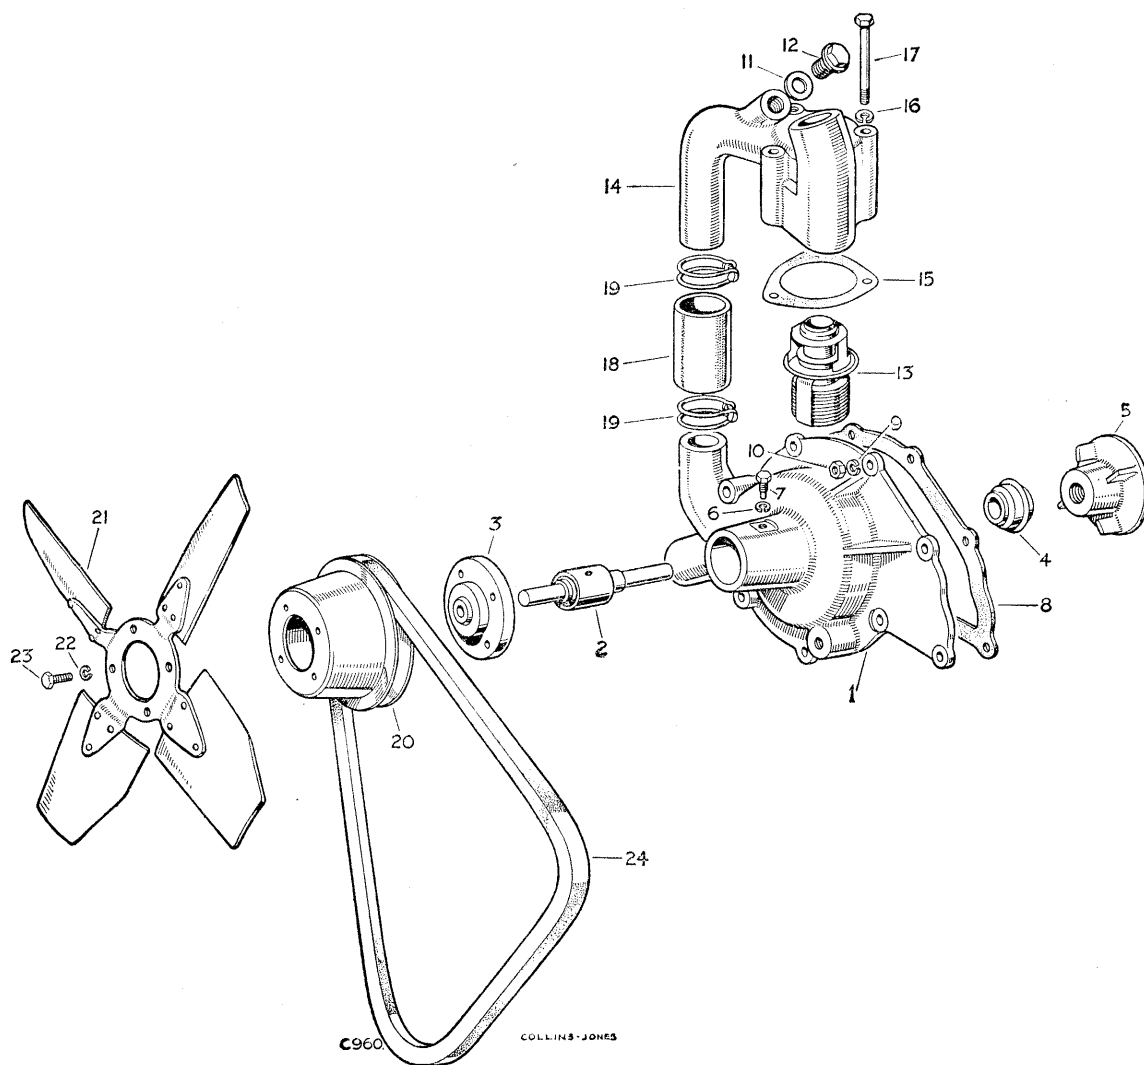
Layout of pump, thermostat and fan, 2½ litre Petrol and 2 litre Diesel
